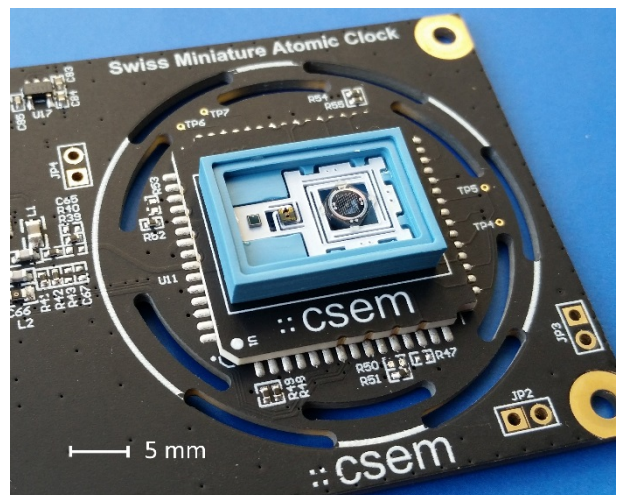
Test PCB platform with a dedicated socket for the MAC PP.
